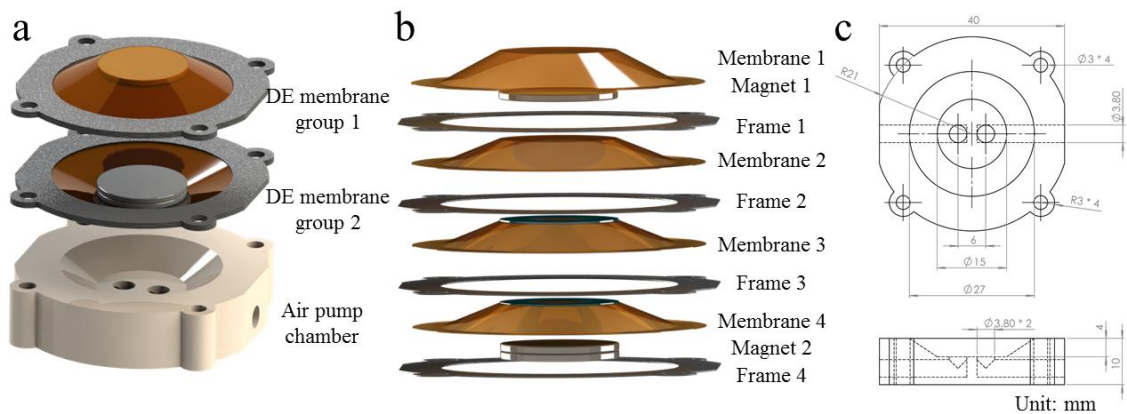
Assembly of (a) the MCDEA pump and (b) DE membranes and magnets. (c) Dimensions of the 3D printed pump chamber.
